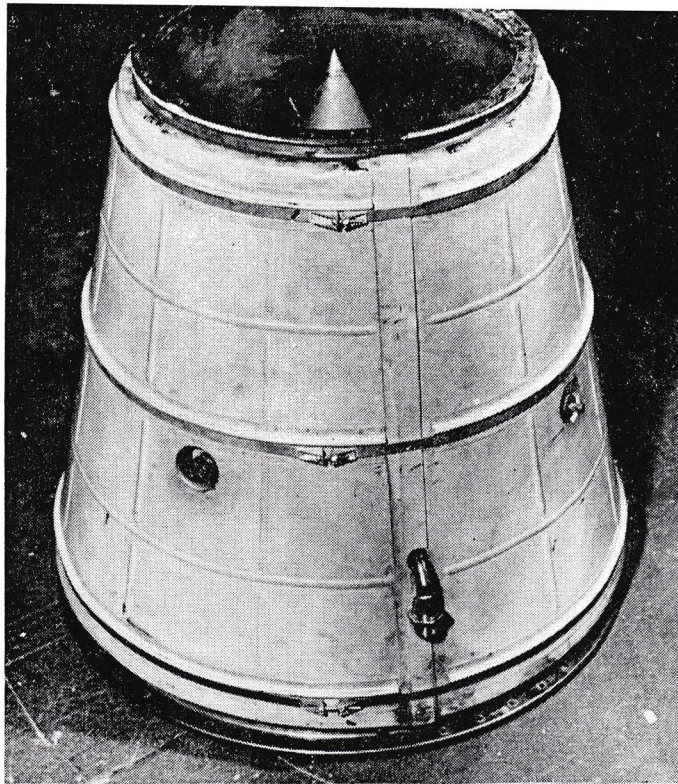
Tail cone assembly introduces new requirements of accuracy to sheet metal work.
